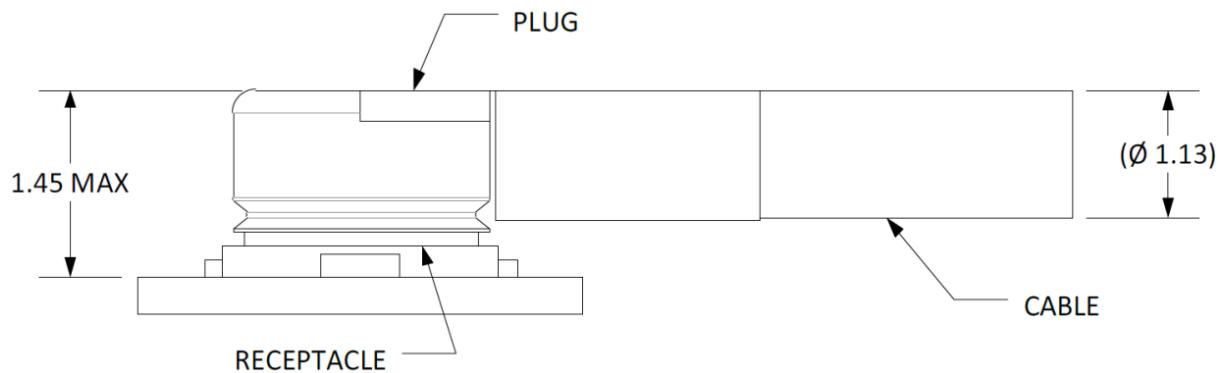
Space Factor of Mated Connectors (\varnothing 1.13 mm Coaxial Cables) (Unit: mm)
